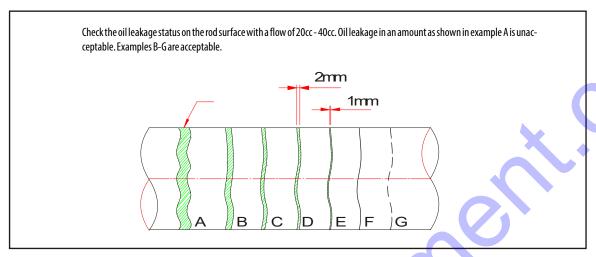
Acceptable Oil Leakage on Cylinder Rod
